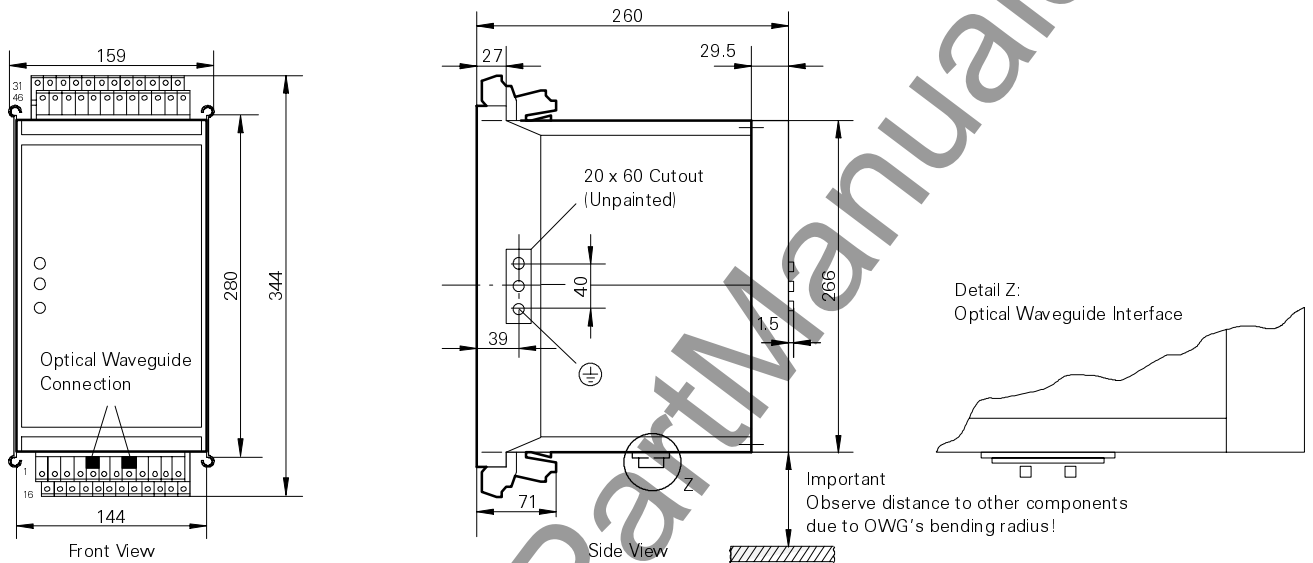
Dimensional Drawing of 7XP2030-1 for Panel Surface Mounting, Device Version 7SA518 (all dimensions in mm)
